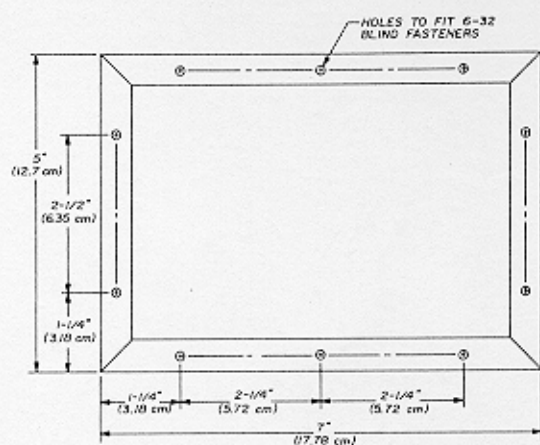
Bottom of the grid box and layout of the cover plate (Bud BPA 1519 or equivalent). The holes in the bottom of the grid box are drilled using the bottom plate as a template.
